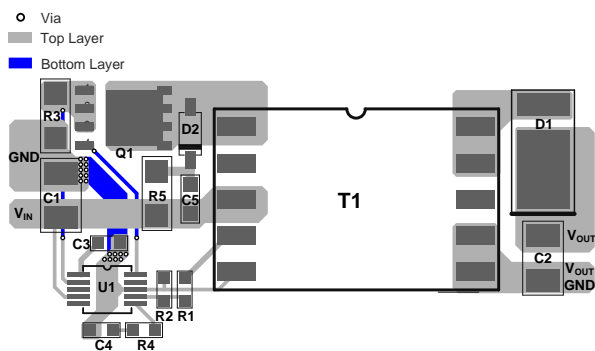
Recommended PCB Layout for Flyback Application ⁽¹⁴⁾
